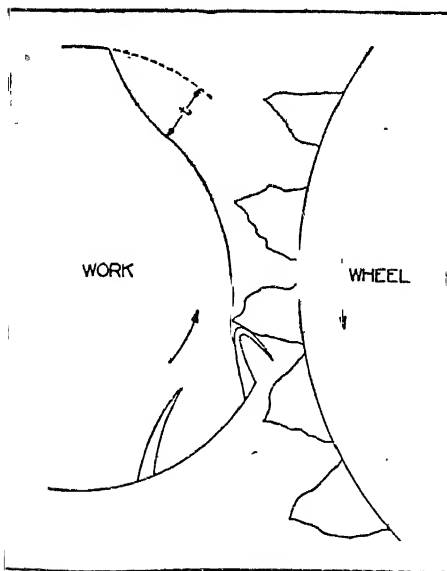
Showing, in exaggerated form, the cutting action of an external grinding wheel.
